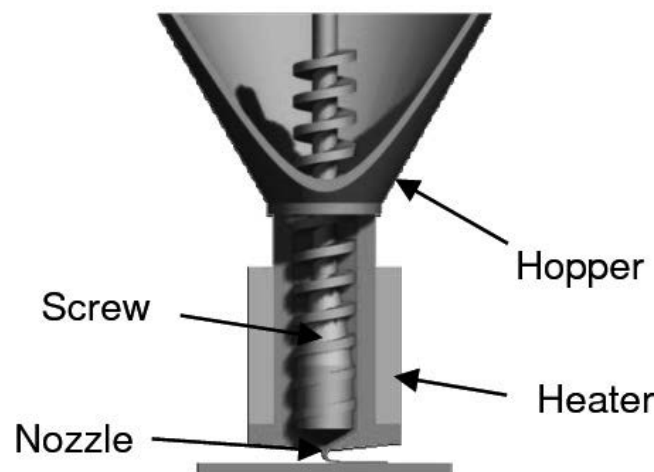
Scheme of a 3D printer with a screw extruder [9]
